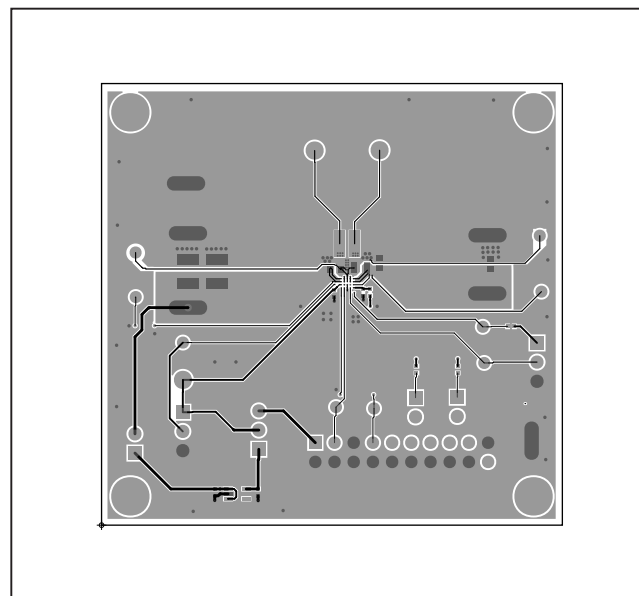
MAX77801 EV Kit PCB Layout—Bottom Side
